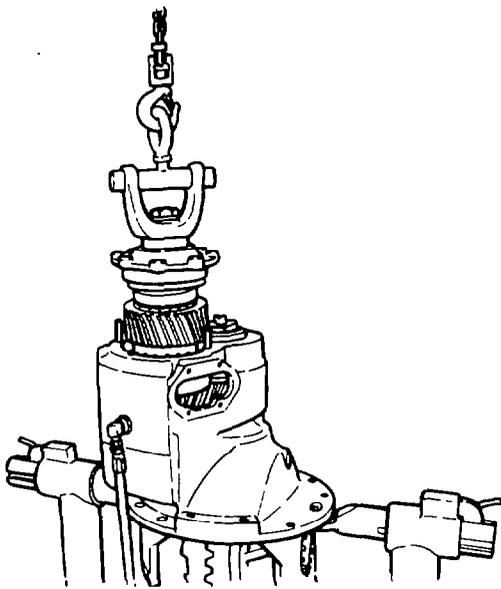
Input Shaft and Inter-axle Differential Assembly — Removal
